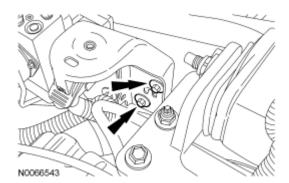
Locating LH Cylinder Block Drain Plug Courtesy of FORD MOTOR CO.
